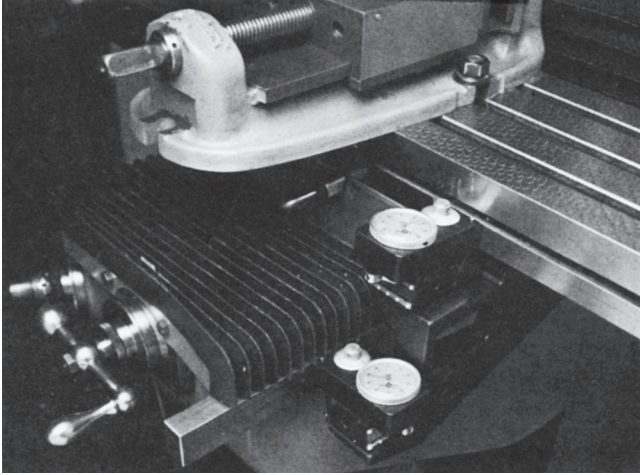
Mechanical dial travel indicators installed on a milling machine (Southwestern Industries, Inc.).
